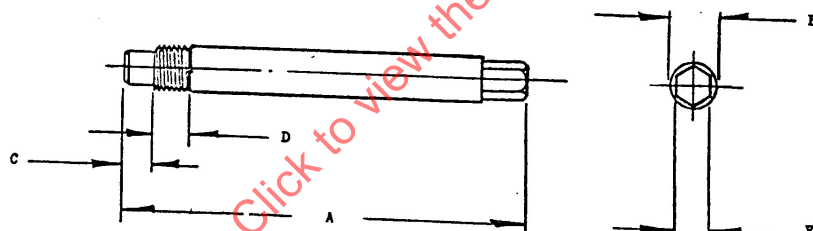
Type III, Class 4, offset tools, spark plug inserts
